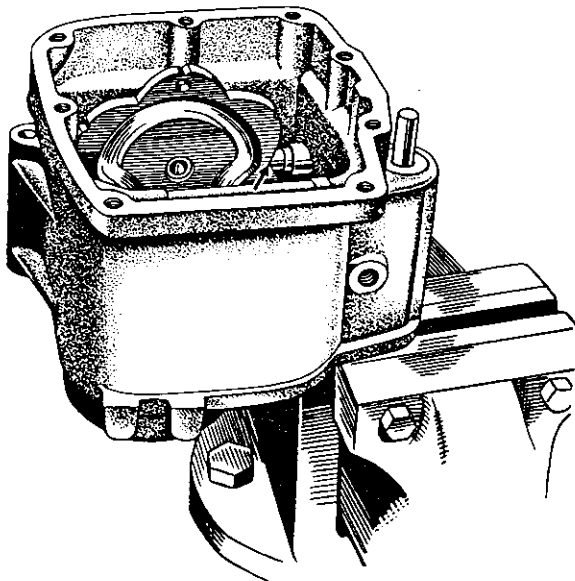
Gearbox Camplate in (High) 4th gear position.
